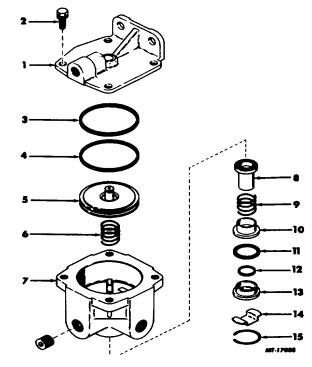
Exploded View of Relay Valve Legend for Fig. 5
